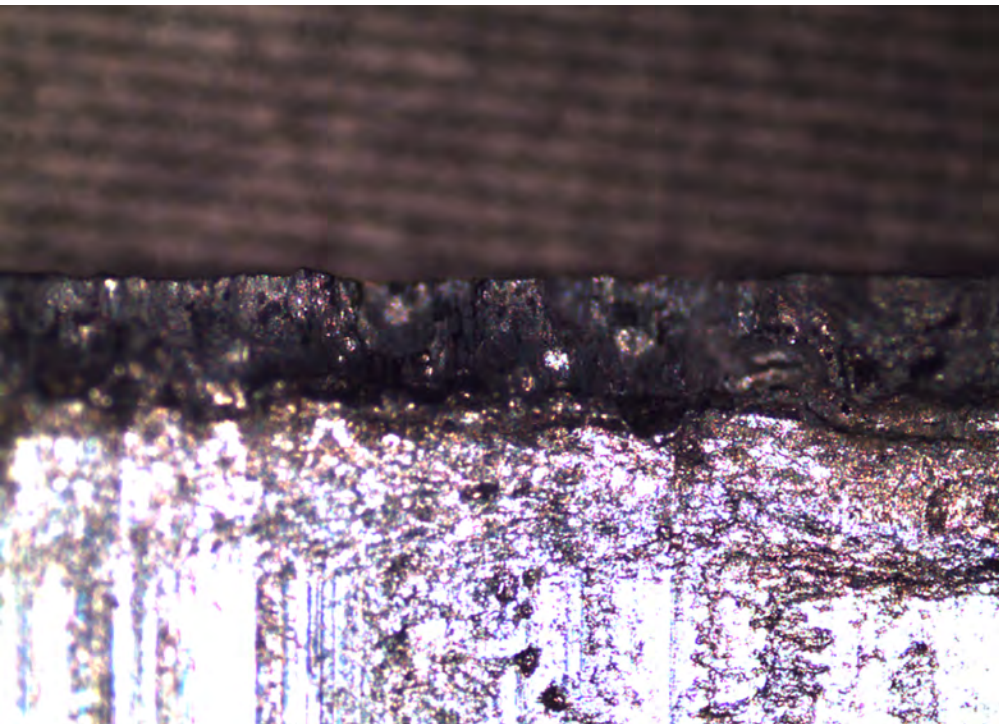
Representative overview of fracture surface using stereomicroscopy.
